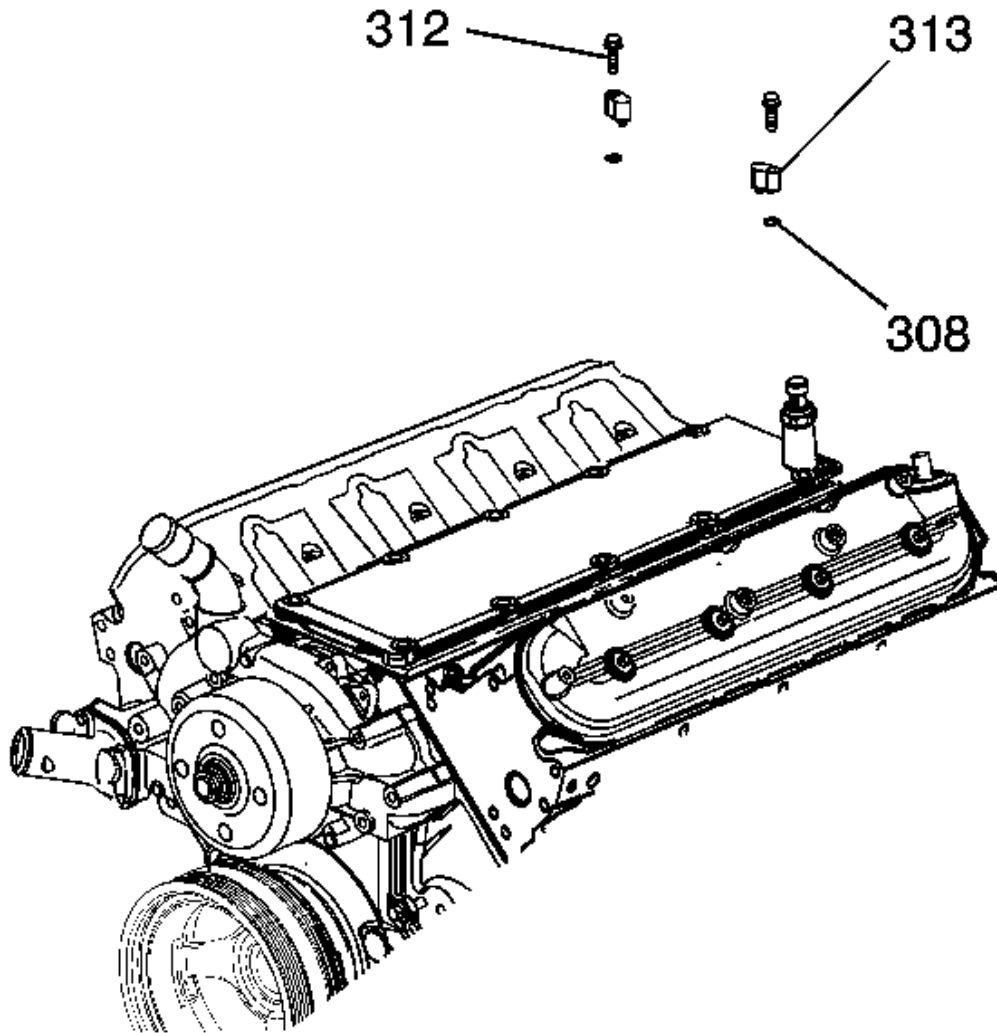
Removing/Installing Engine Coolant Air Bleed Pipe
